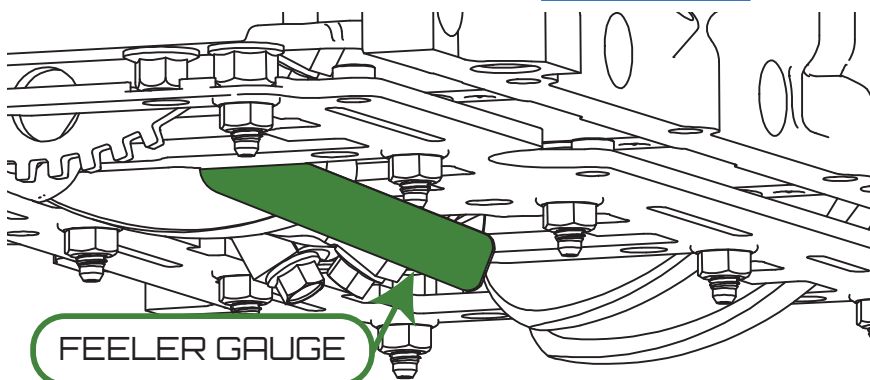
Inspecting Clearance with a Feeler Gauge
